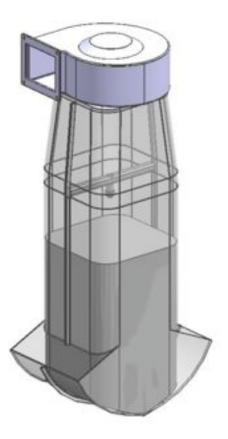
Picture showing the final design of the chamber with radial fan, nozzle and tower packings.
